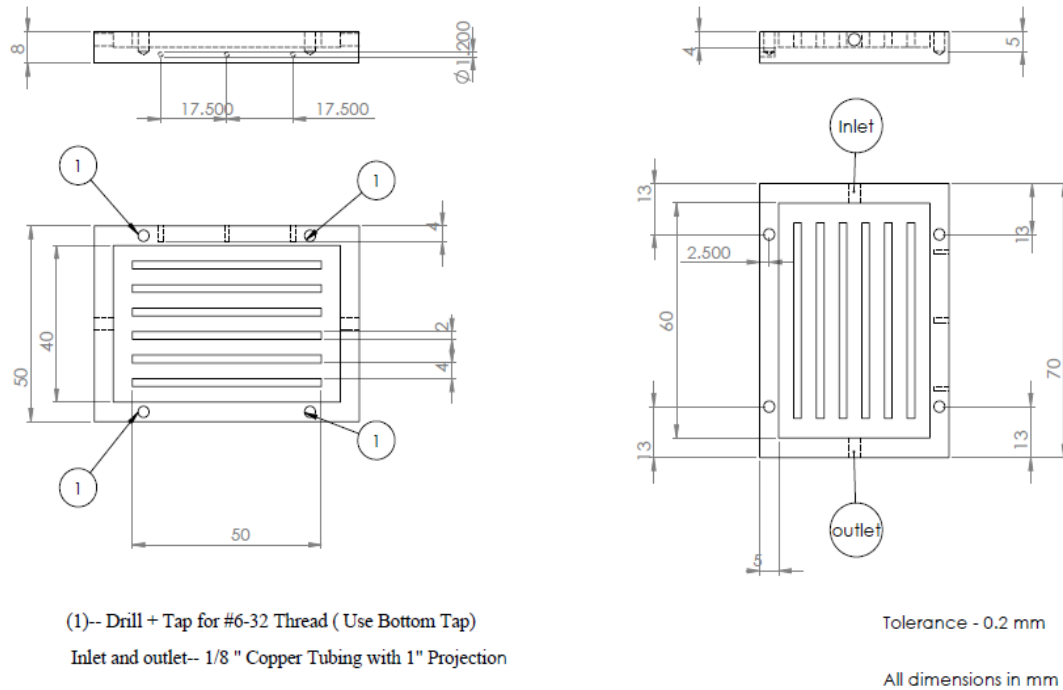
Two Dimensional Draft of 4mm minichannel heat sink
